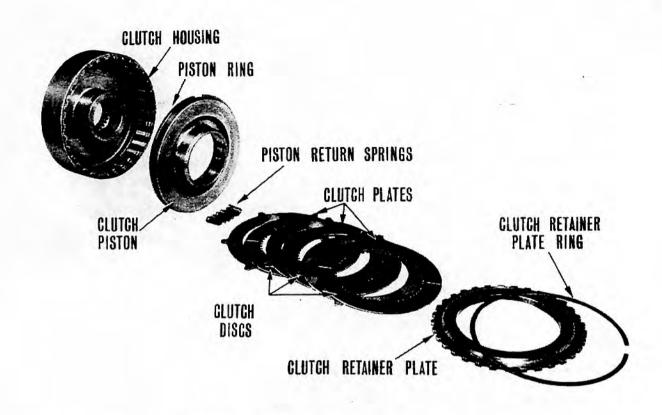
EXPLODED VIEW OF HYDRAULIC CLUTCH
